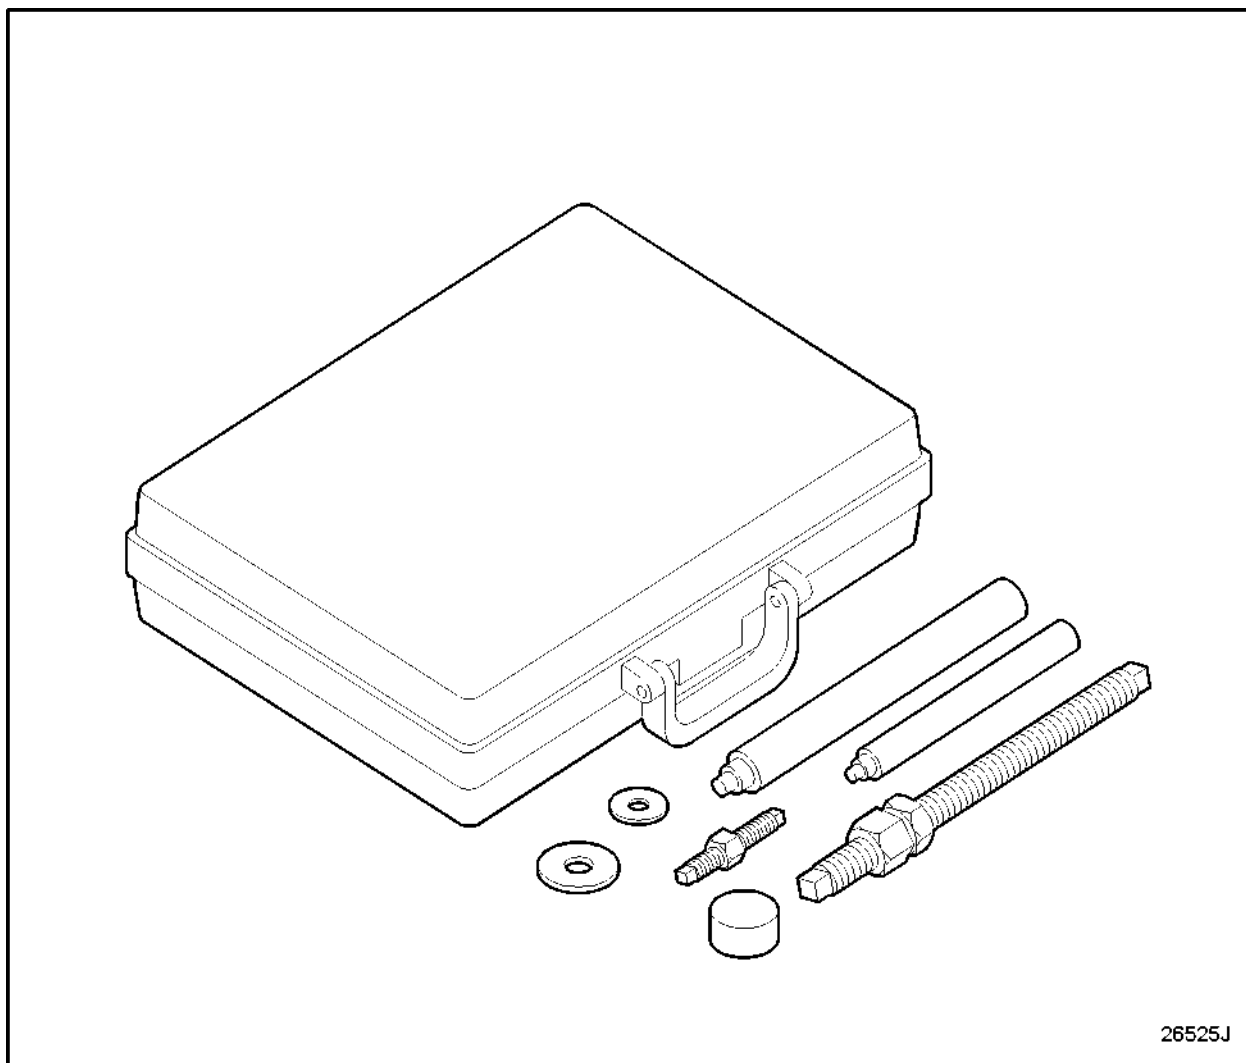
Cam Shaft Bushing R & I, J 39537
